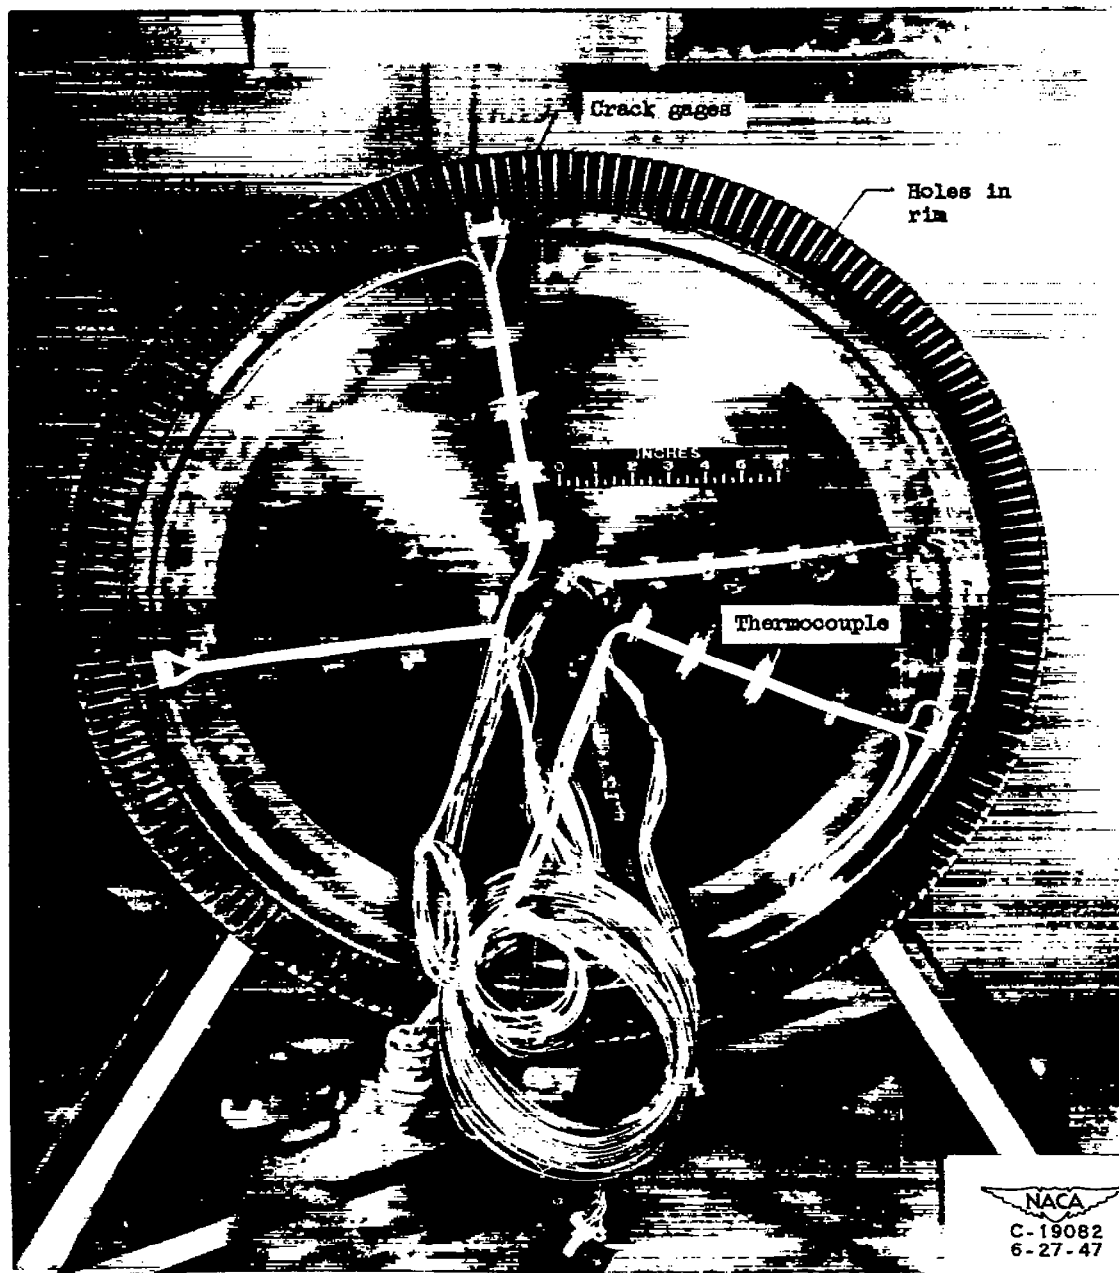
Holes, thermocouples, and crack gages on downstream side of gas-turbine wheel.
